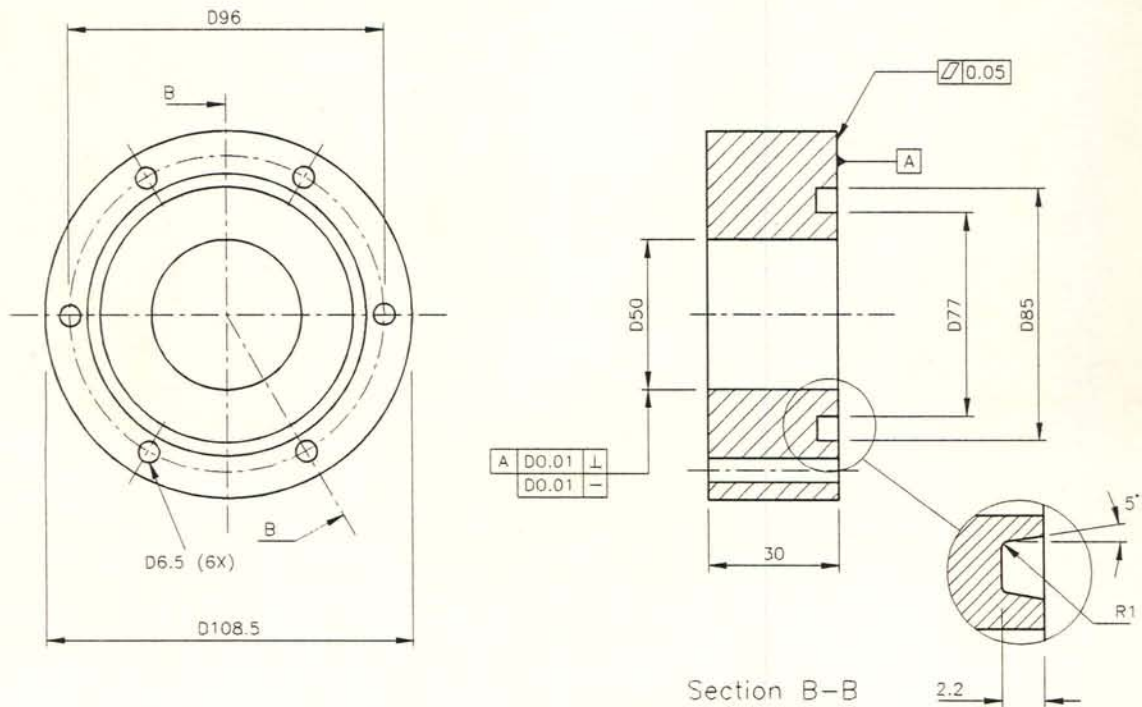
(c): Orifice 1 pipe flange: Detail drawing.
